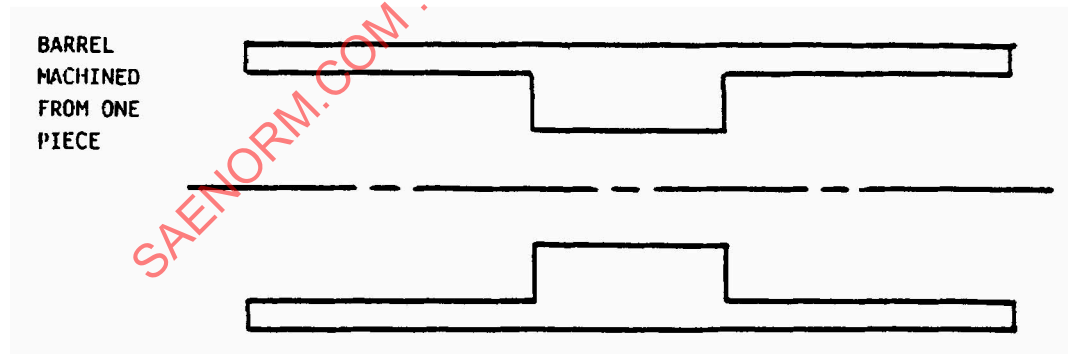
One Piece Machined Rip-Stop Configuration
